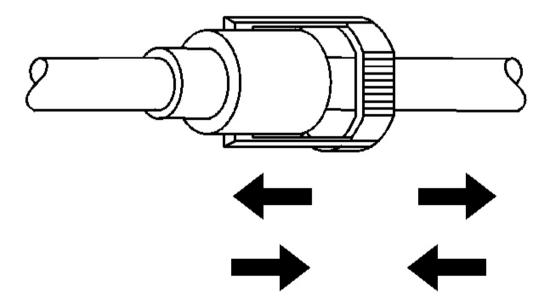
Securing The Connection Courtesy of GENERAL MOTORS CORP.
